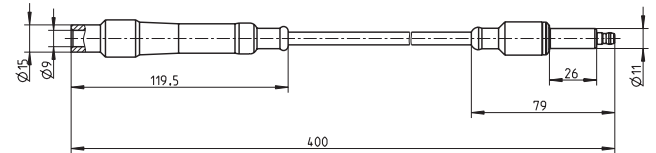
Spark plug extension cable Type 1500A97 (L = 400 mm)
